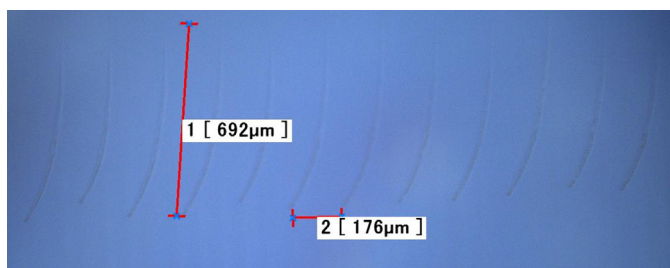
Microscopic side view of a weld seam with high feed-rate.
